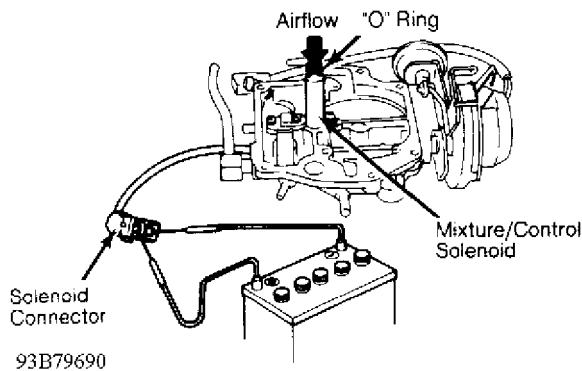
Checking Mixture Control (M/C) Solenoid
